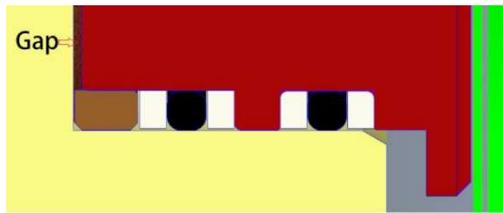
Partial enlarged view of inner valve seat sealing ring and surrounding.
